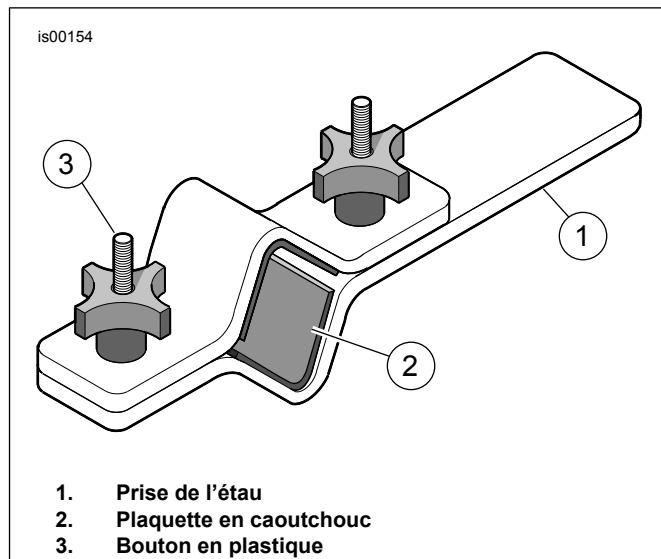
Fork Tube Holder (Support de tube de fourche) (HD-41177)
